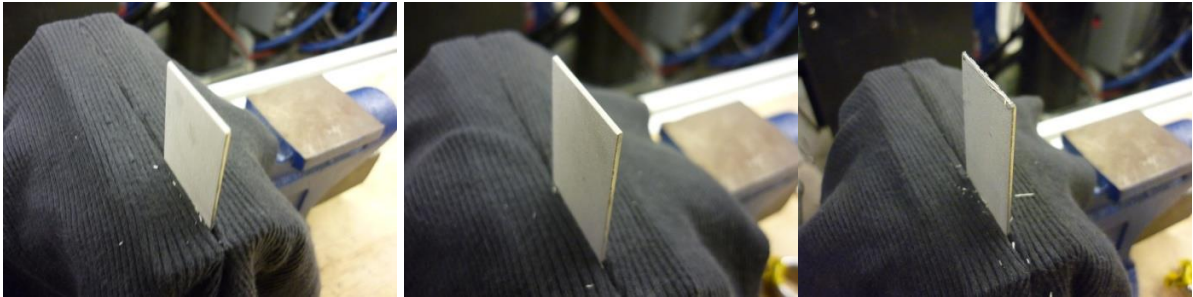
Aluminum 5083 strip rupture samples prior to bending (coating on aluminum IVD coating).
